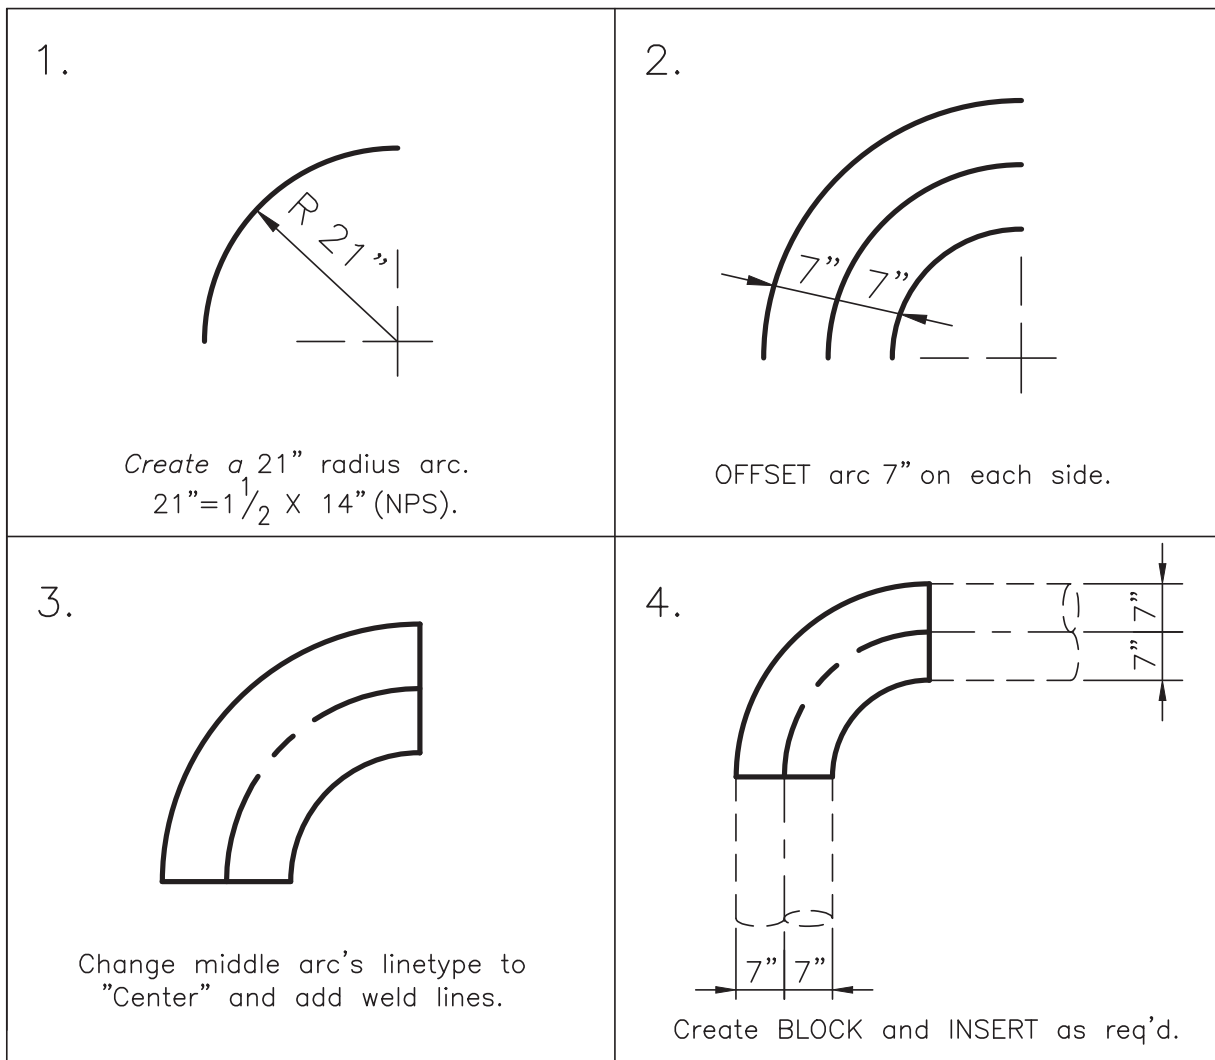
14"-90° elbow. AutoCAD step-by-step drafting procedure.
